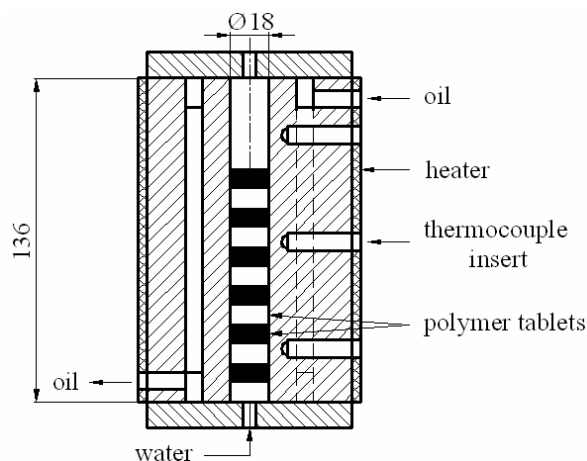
Cylinder Mold for Water Injection Molding (unit: mm)
